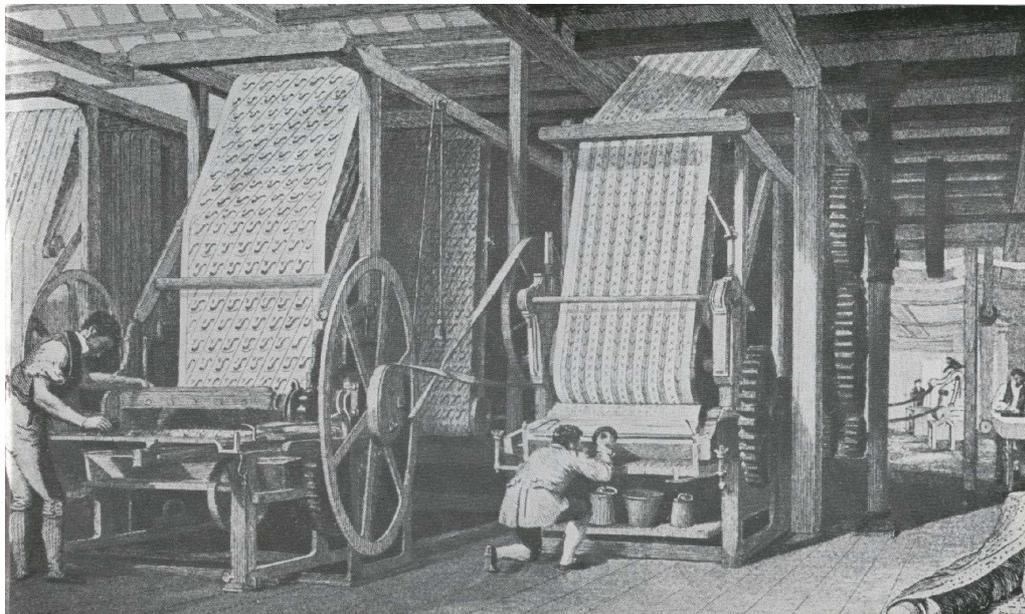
The mechanised calico-printing process in a cotton mill during the 1830s, showing on the left a machine with engraved copper rollers transferring the pattern onto the cloth, and on the right is a block printer using a hand-carved wooden block. (drawn by T Allom and engraved by J Carter, and taken from Chaloner and Musson 1965)
